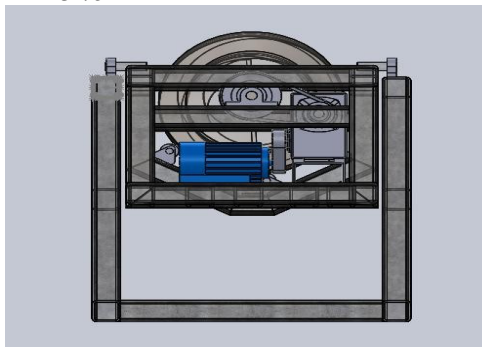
Position of the Drive Motor on the Mixer Machine
